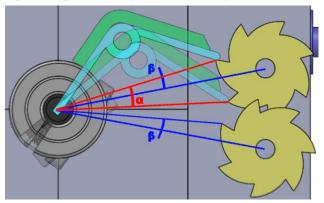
A top view of the angle of rotation provided by the motor to move one tooth of the input gear. This 14.93 degree rotation in the motor shaft (denoted by angle *a*) produces approximately 1.29 degrees of rotation in the output shaft. The angle β is the dephase angle of the two input gears.
